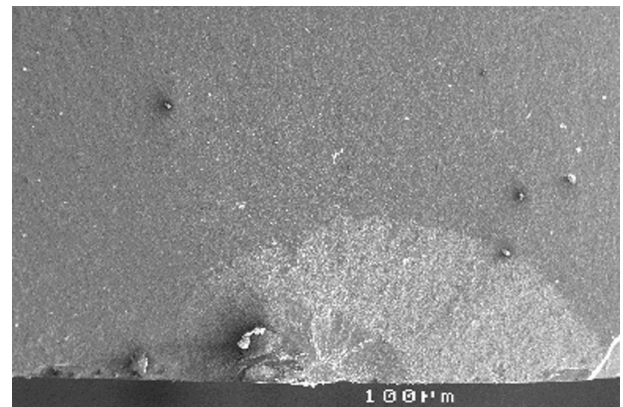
Fracture surface of specimen tested under static fatigue loading at 1300°C. Visible are indentation crack, and regions of the fatigue and fast crack growth.
